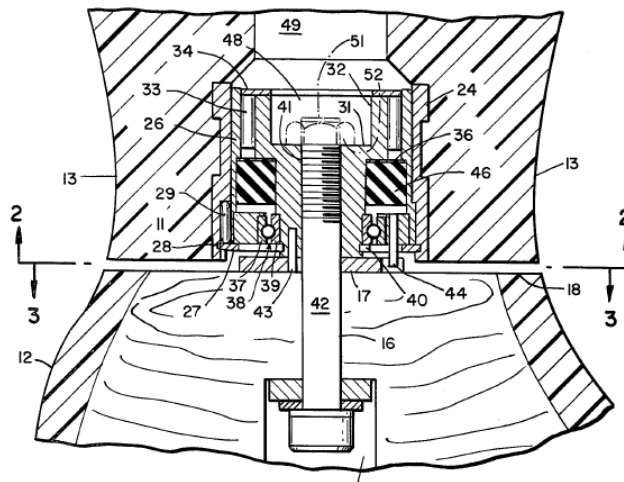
Cross-sectional side elevation of the rotator assembly installed in an ankle block [29]
